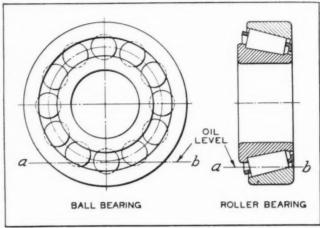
Diagrams Showing Oil Level for Ball and Roller Bearings
